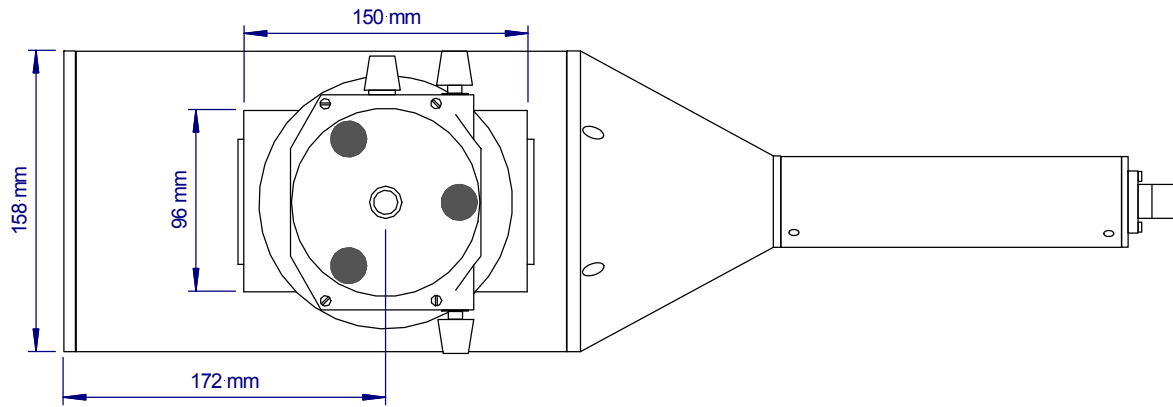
BLS450 / BLS900 Receiver – Bottom View
